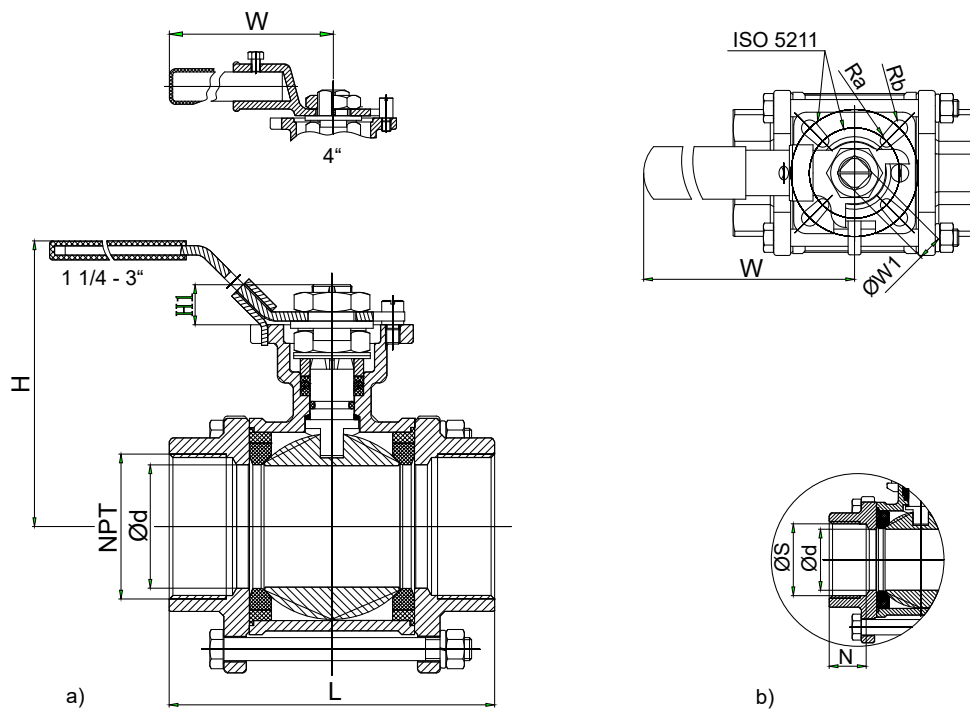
Dimensions and weights of ECOLINE BLC-P3D
